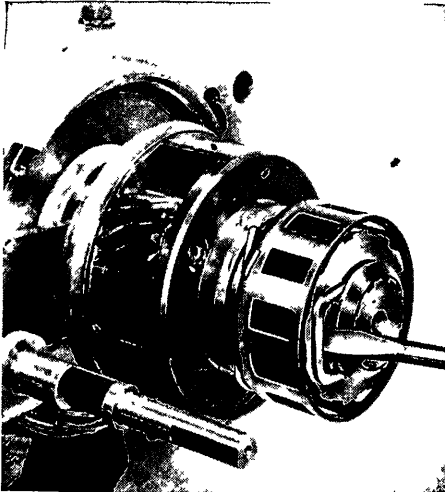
Remove retaining clip and take off free wheel unit and pinion cage
